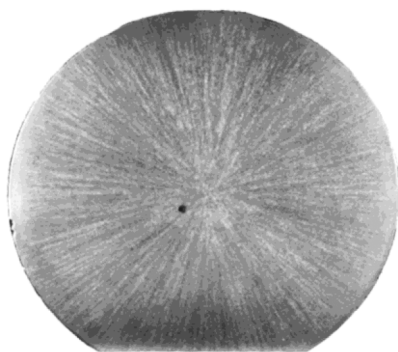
Columnar macrostructure of a rolling mill barrel made of ductile iron cooled in a $\varnothing 450$ mm mold [9]
